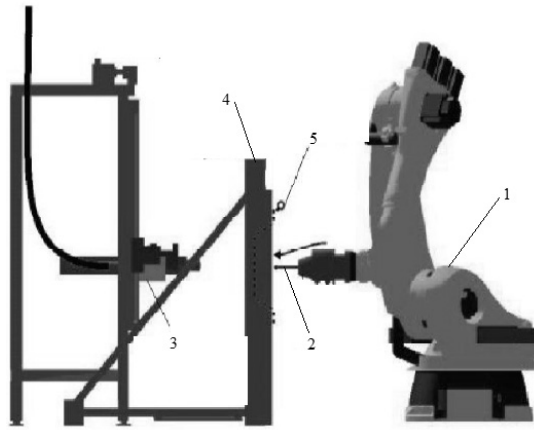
Laser forming, [16]: 1 - 6-axis robot; 2 - Forming tool;
